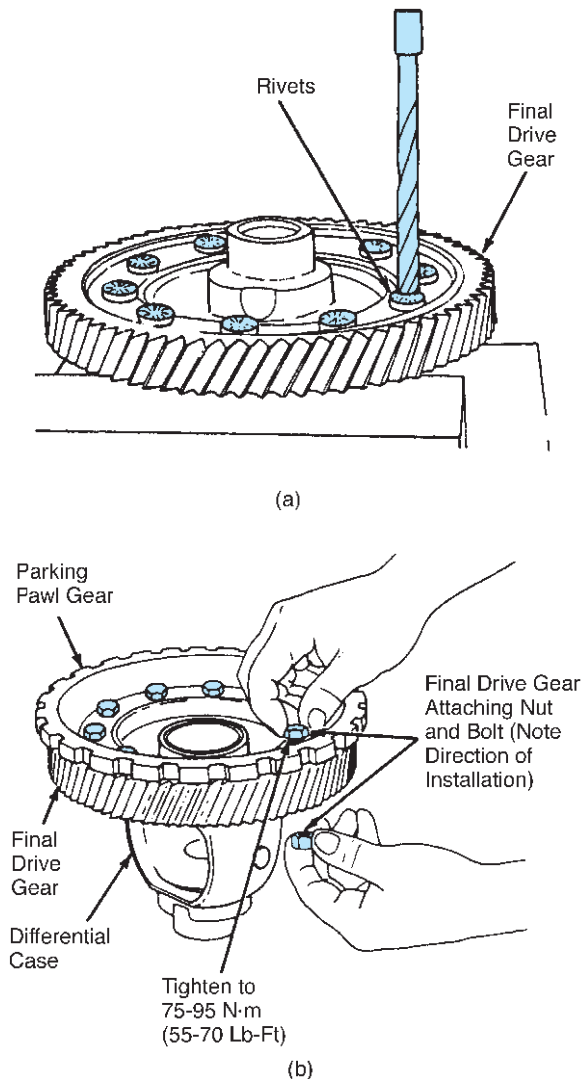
This final drive ring gear is riveted to the differential case. To replace it, the rivet heads are removed using a drill and chisel (a), and the new gear is installed using bolts and nuts (b). (Courtesy of Ford Motor Company)
